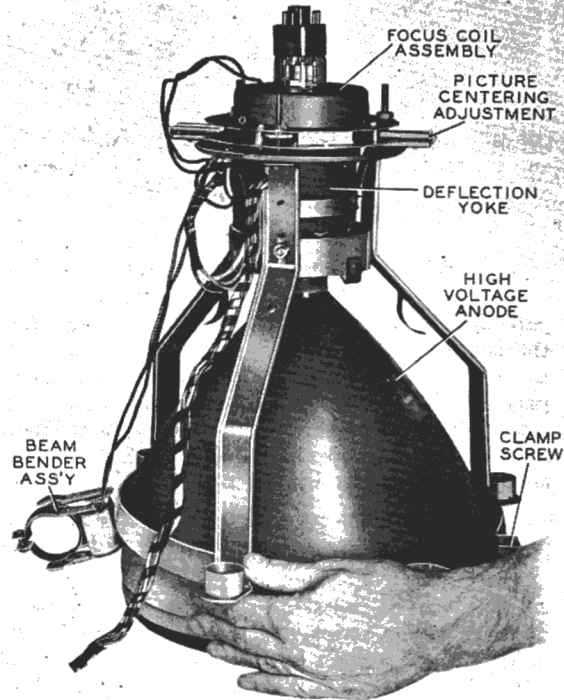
ASSEMBLING PICTURE TUBE IN MOUNTING
